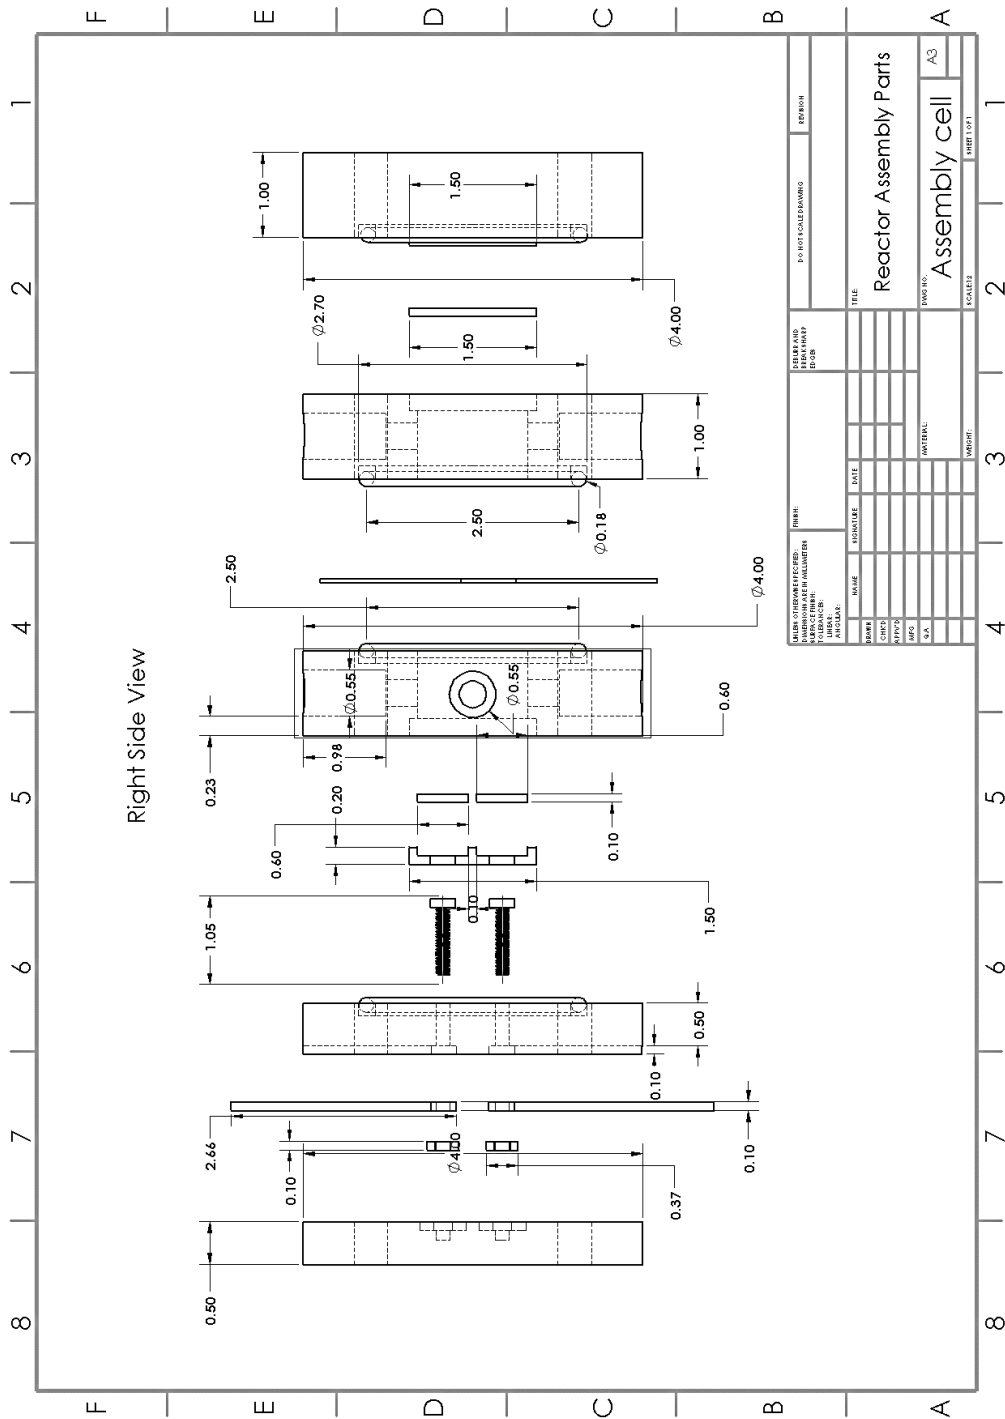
A drawing with measurements for the reactor assembly parts.
